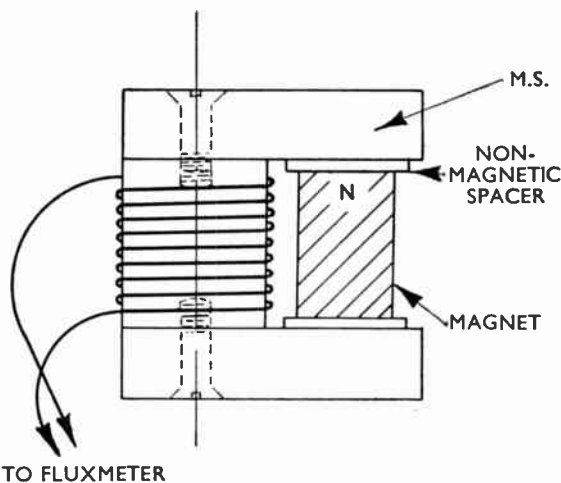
A jig for testing a magnet at a point on its BH curve. The reluctance of the magnetic circuit of the jig should be similar to that circuit in which the magnet is intended to work, and under these conditions test in this jig will indicate the final performance of the magnet.
